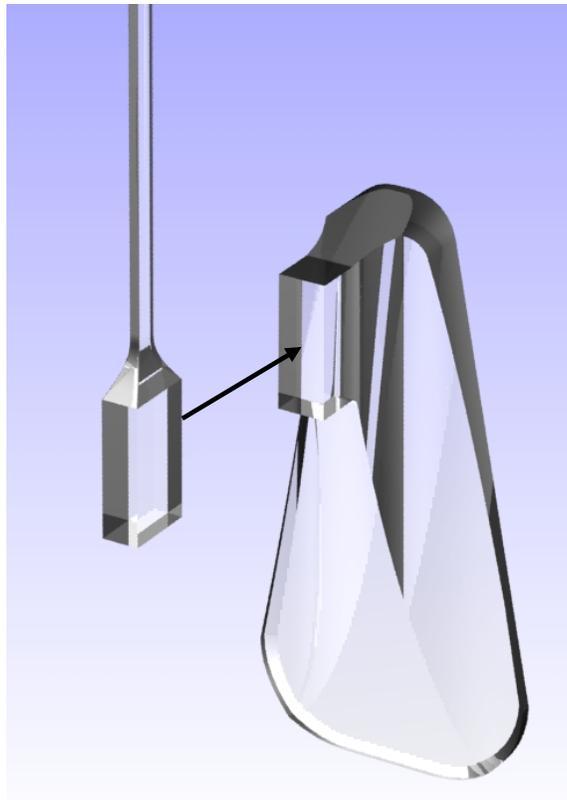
Preliminary ear design (triangular face) to accommodate lap-welded ribbon with thick end piece (Drawing No: D050169-07).
